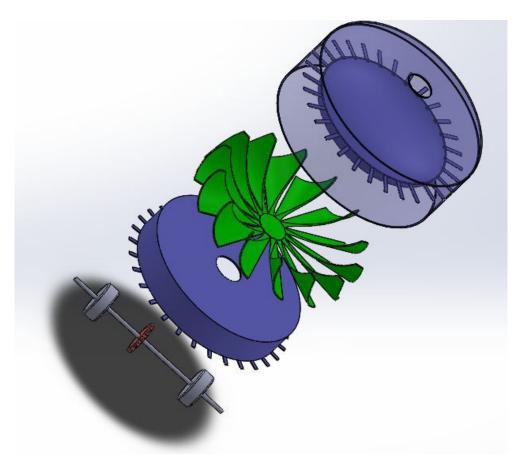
An assembly diagram using Solidworks. The blue teeth are actually just supports, they have not rotational or gear like purpose. Additionally, by using part design and assembly the model became much less cumbersome to work with.
